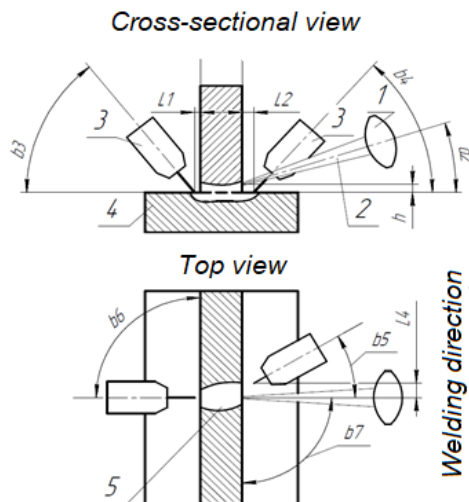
LAHW scheme, "hybrid + arc" method of fillet welds in horizontal and vertical position (PB)
